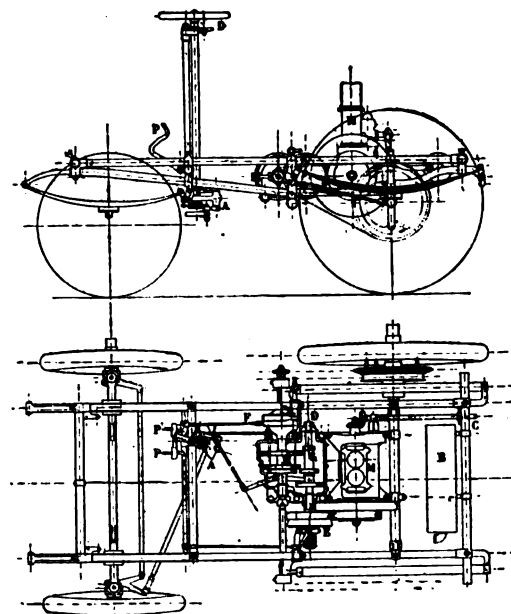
ELEVATION AND PLAN OF "TERAS" 12 H.P. FRAME.
